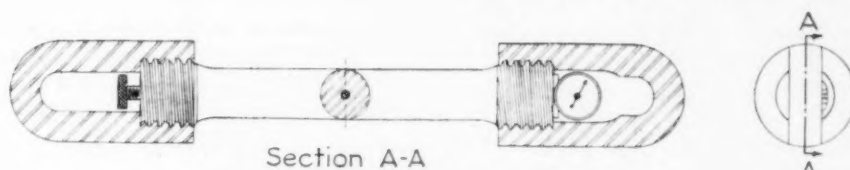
Assembly of Proving Bar with Shackles in Section.
